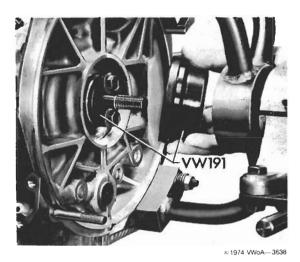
Seal installing tool VW 191 that is used on dual-carburetor engines. The inner part is held on the crankshaft by two of the flywheel bolts.
